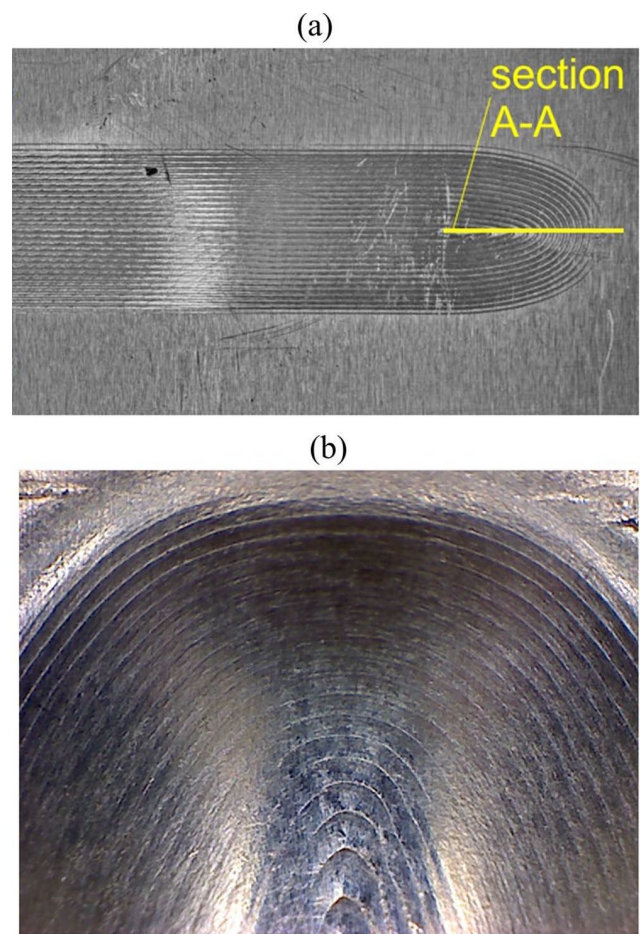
View of external (a) and scratch bands (b) on the rib surface; depth of rib 5.5 mm, multi-step z-level contouring tool path
